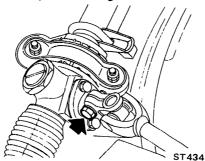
Loosening nut securing lower joint to pinion gear
